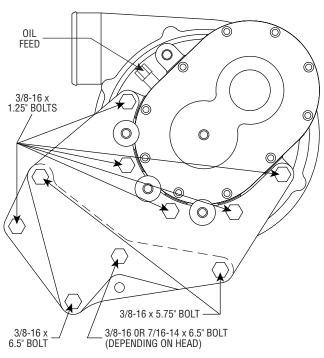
c / Driver side supercharger mount. (64-68 Mustang)
